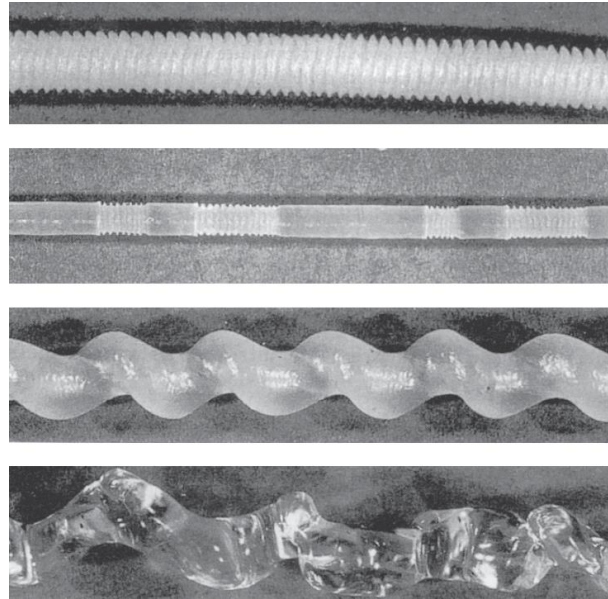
Different examples of extrusion defects (up-down): a) sharkskin; b) stick-slip; c) helical defect; and d) gross melt fracture (Sung-Hoon, Montero, Odell, Roundy, & Wright, 2002)
